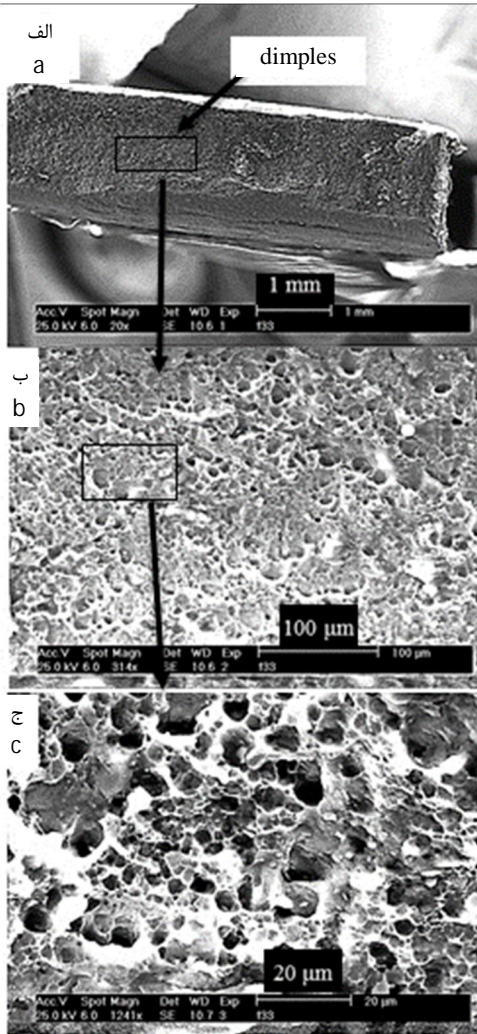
The SEM image of fracture surface of sample No.1 at Ti alloy side (a) fracture surface (b),(c) fracture surface with higher magnification
